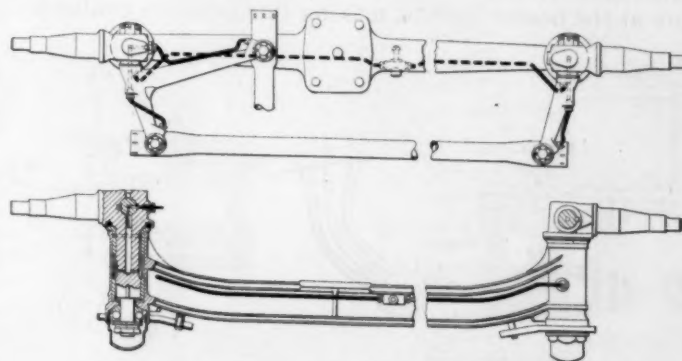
LUBRICATION OF A FRONT-AXLE ASSEMBLY
